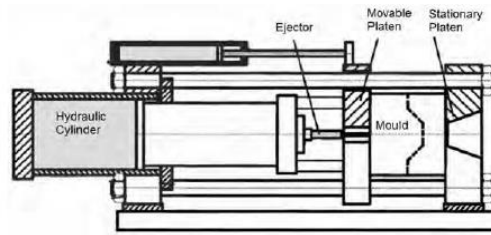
Clamping unit of injection moulding machine (Funda, 2014)
